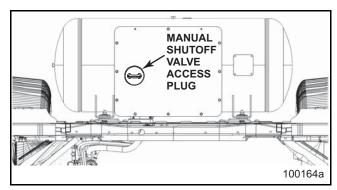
E-150/250/350 Manual Shutoff Valve Access Plug
